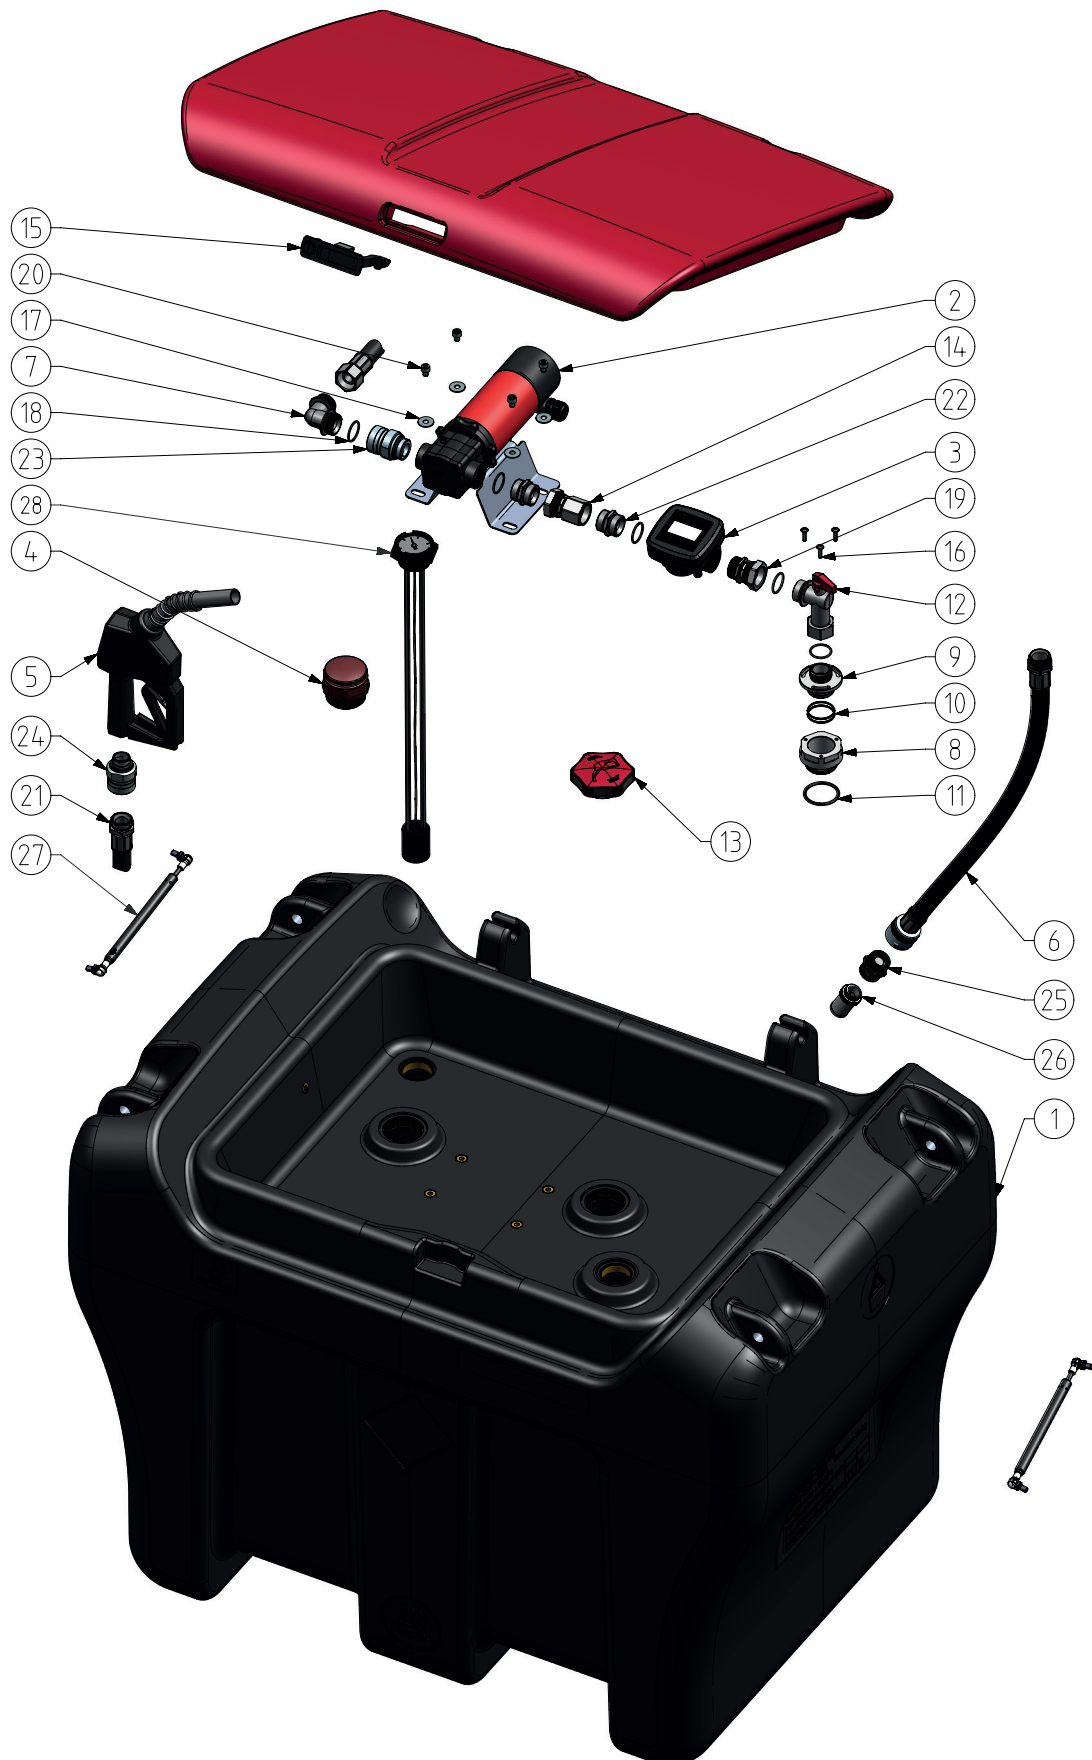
1: Exploded view mobiMASTER-54 l/min
